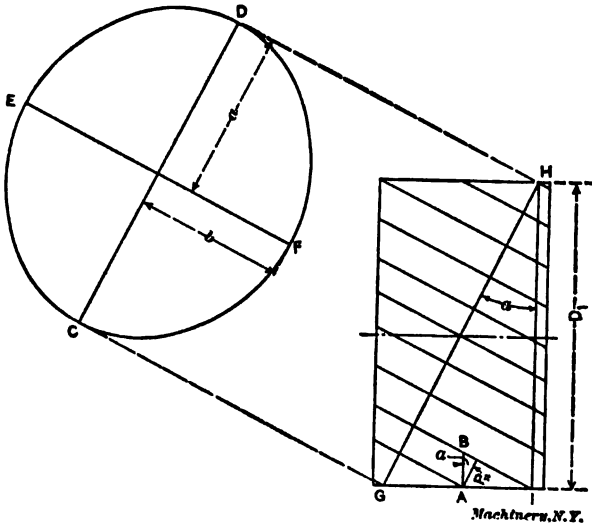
Diagram for Deriving the Formula for Determining Spur Gear Cutter for Cutting Spiral Gears
